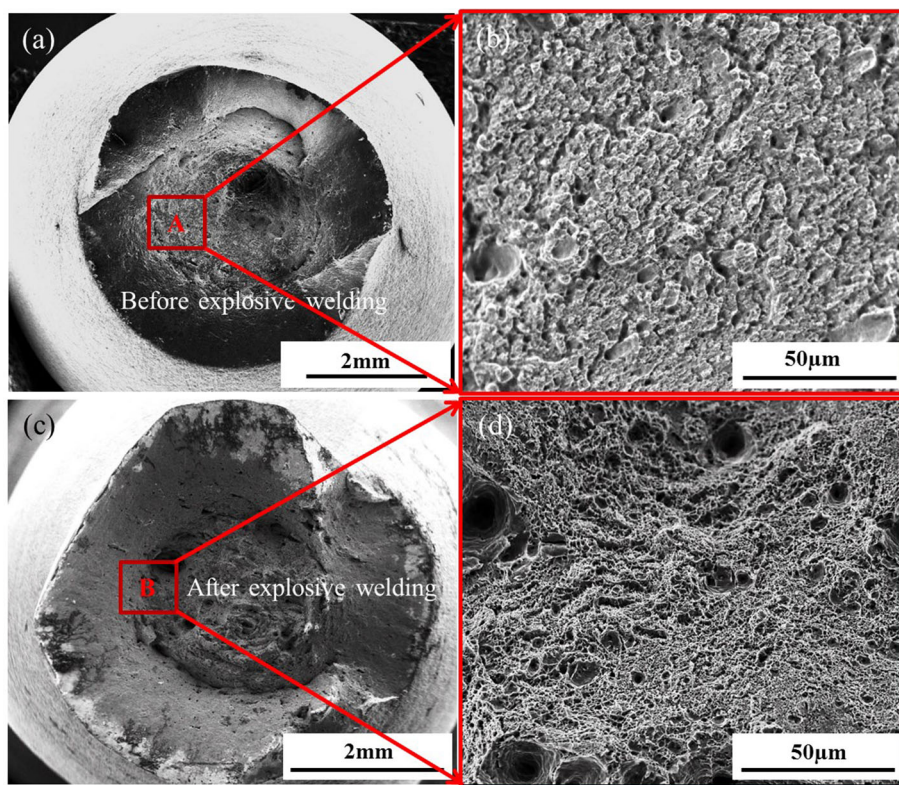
Fractography of the base material HSLA steel 10CrNi3MoV after the tensile tests, (a) macro-fractography of the material before explosive welding, (b) high-resolution fractography of position A, (c) macro-fractography of the base material after explosive welding, (d) high-resolution fractography of position B
